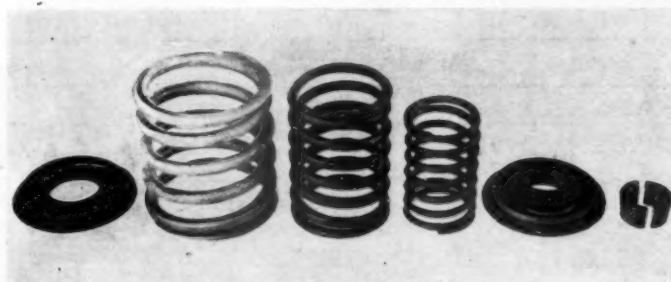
Inlet valve springs of BMW 801 A.1.
